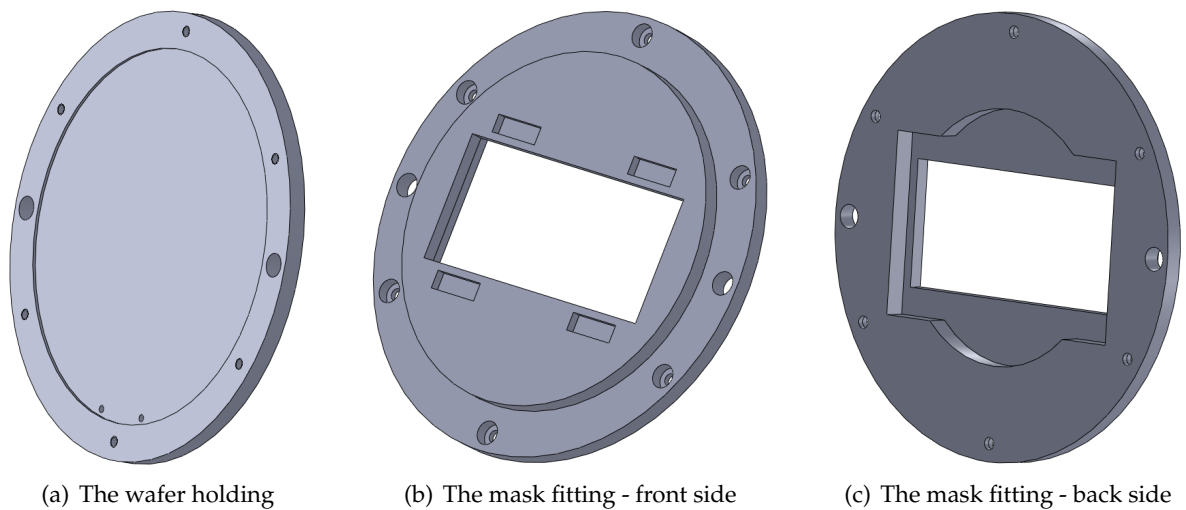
Wafer holding and mask fitting. The wafer holding has a recess of 850 μm . The mask is fixed at the back of the fitting and is hold by four magnets embedded at the front of the fitting.
